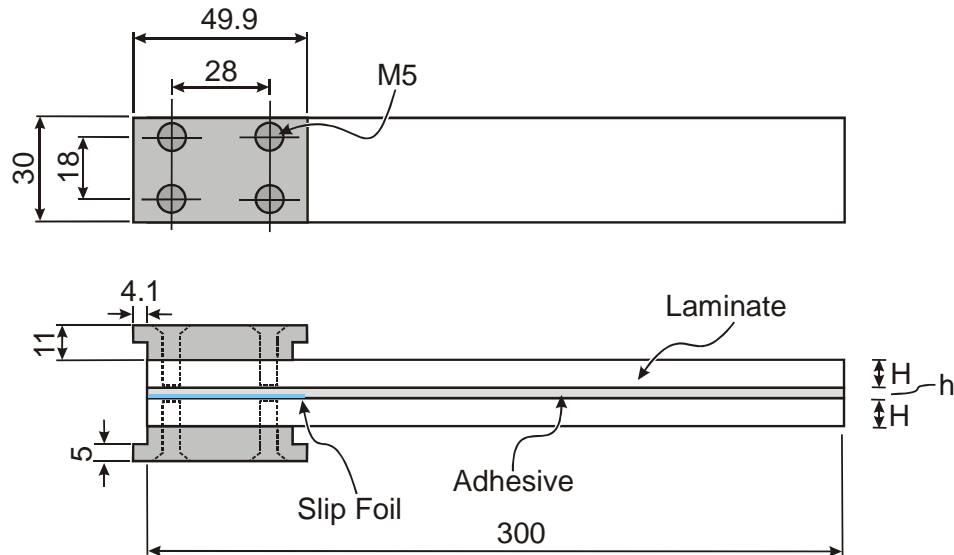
Sketch of the specimen geometry. Steel parts are attached to the laminates by screws and adhesive. Nominal dimensions: $H = 8 \text{ mm}$, $h = 3 \text{ mm}$ and $B = 30 \text{ mm}$. [Mixed_mode_specimens_dimensions_1b.cdr]
